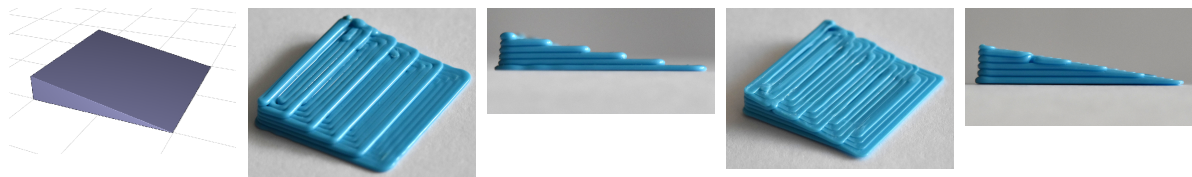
Printing a wedge model clearly reveals the staircase defects that plague 3D printing. (a) Input 3D model; the bottom edge length is 20mm and the angle of the incline plane is 10. (b) Global view and (c) side view of a standard, flat layer printed result. (d) Global view and (e) side view of our anti-aliased printed result, revealing the improvement in surface accuracy and silhouette smoothness
